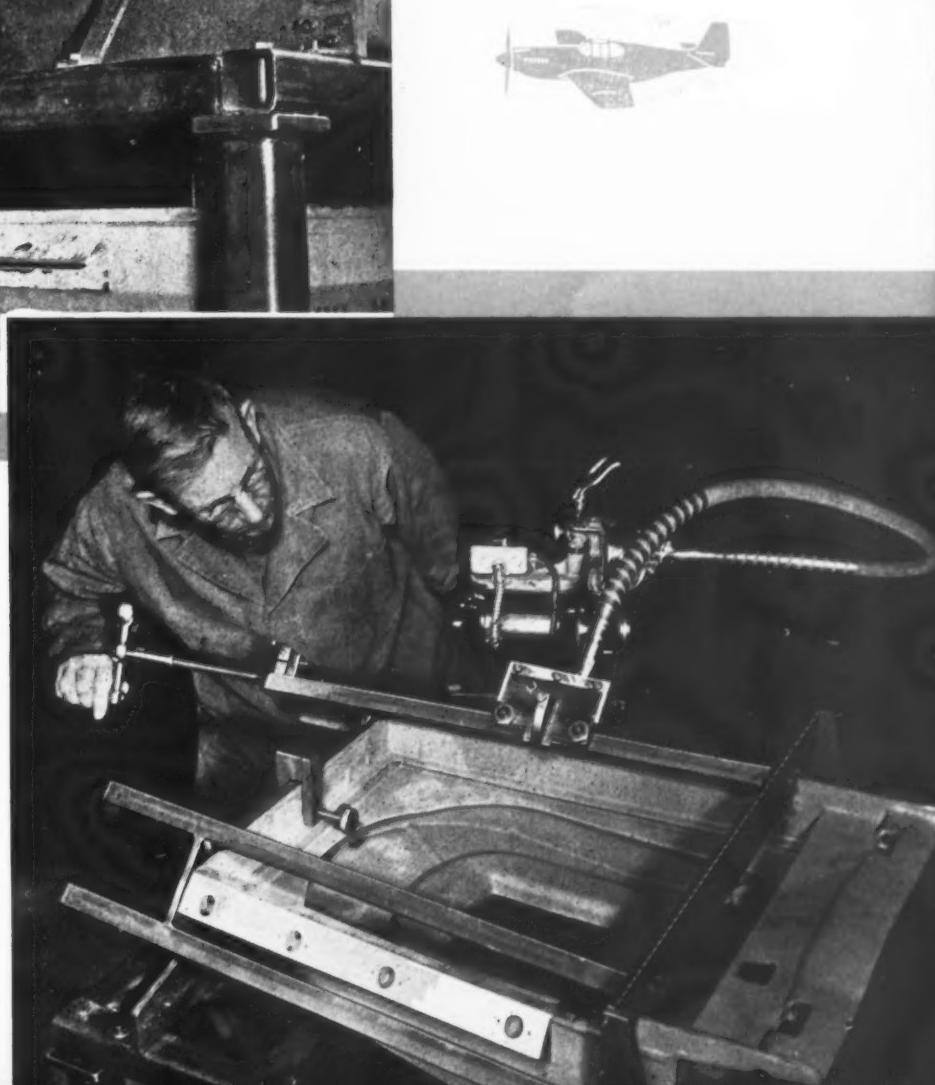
Another View of the Fixture and Cutter-head Illustrated in Fig. 7, Showing Method of Advancing Cutter-head along Fixture
